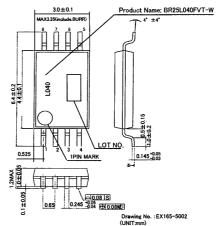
(d) PHYSICAL DIMENSION TSSOP-B8 (BR25L040FVT-W)
